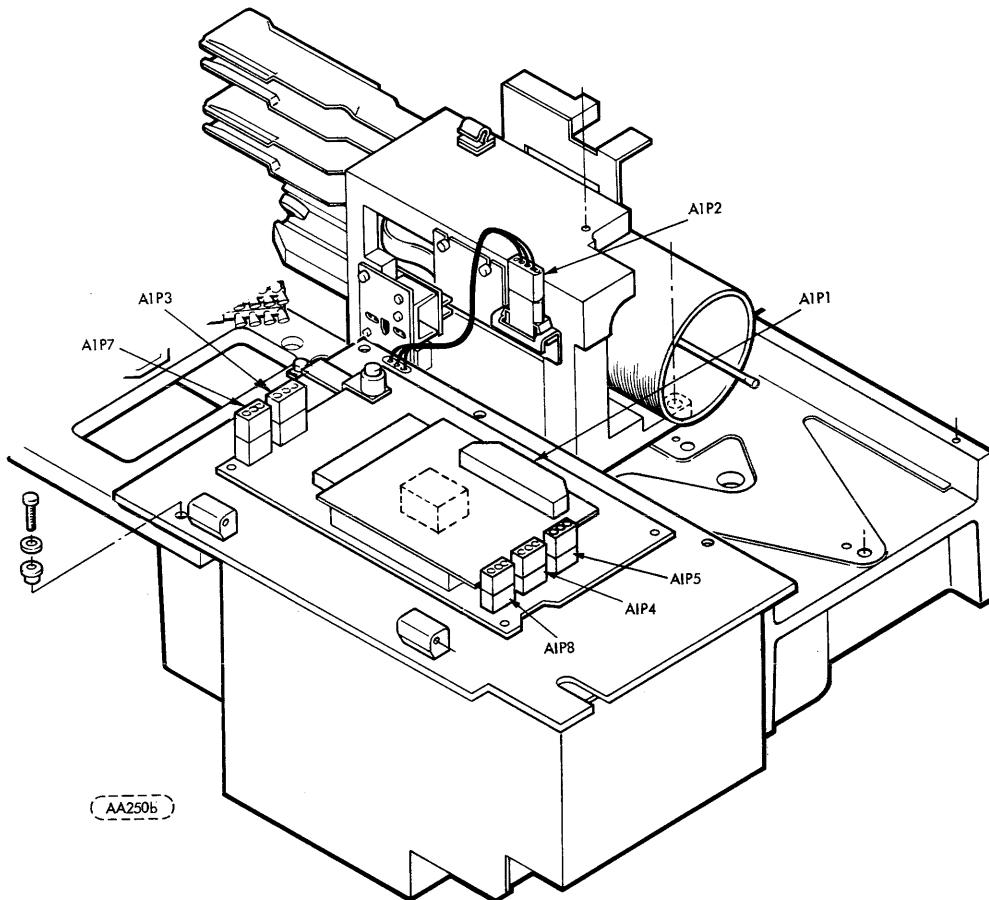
POWER SUPPLY ASSEMBLY
